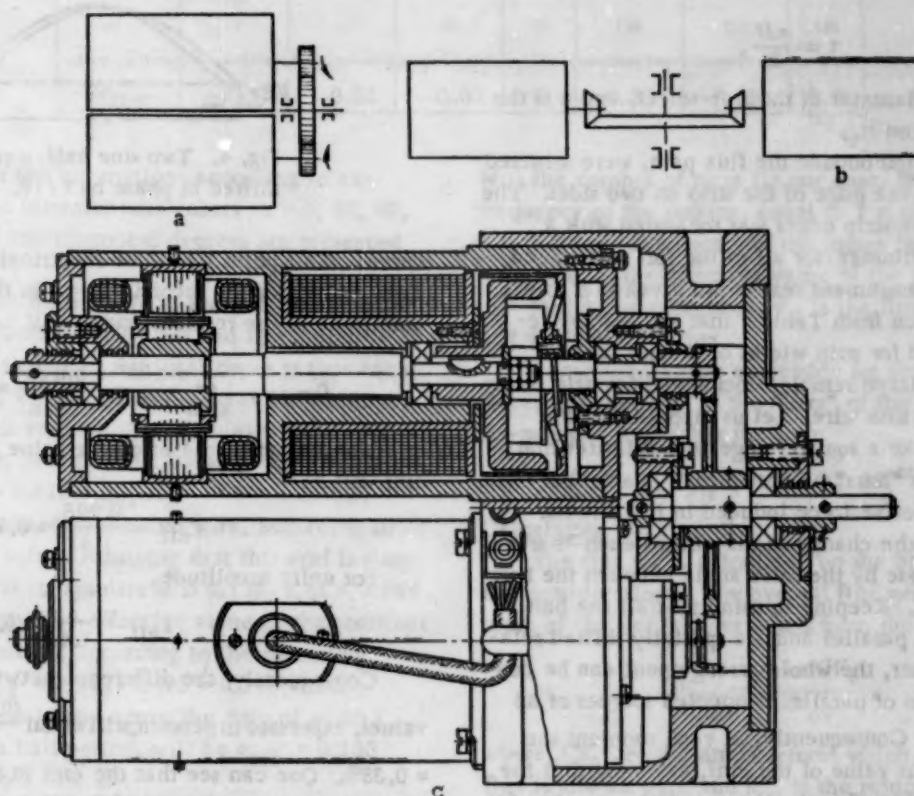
Combination of the two halves of the clutch with a gear box. a) Using spur gears, b) using bevel gears, c) actual construction of the type of combination shown in a).
